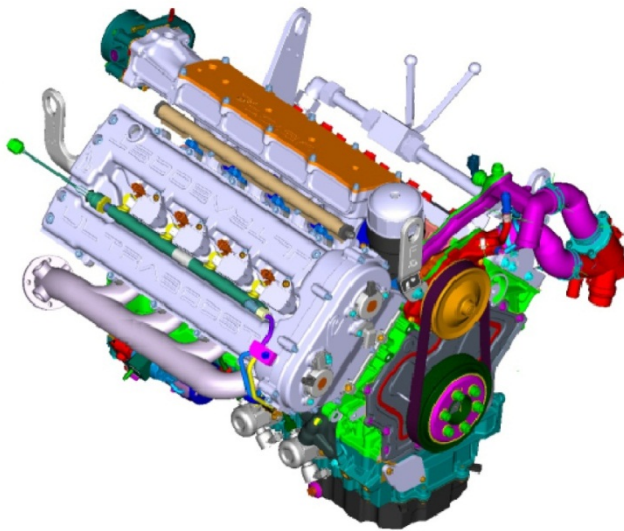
CAD view of the UB100 engine showing AJ133 base engine, new cylinder head, and coolant bypass (adapted from Turner et al.⁴)
